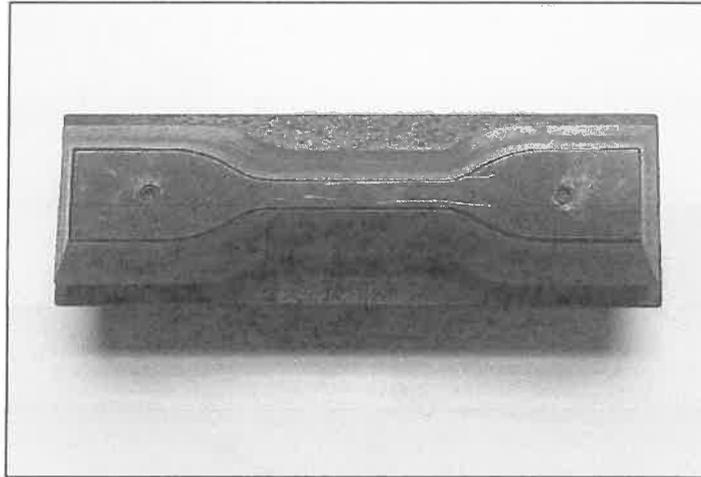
Dumbbell shape ASTM D638 Type IV
